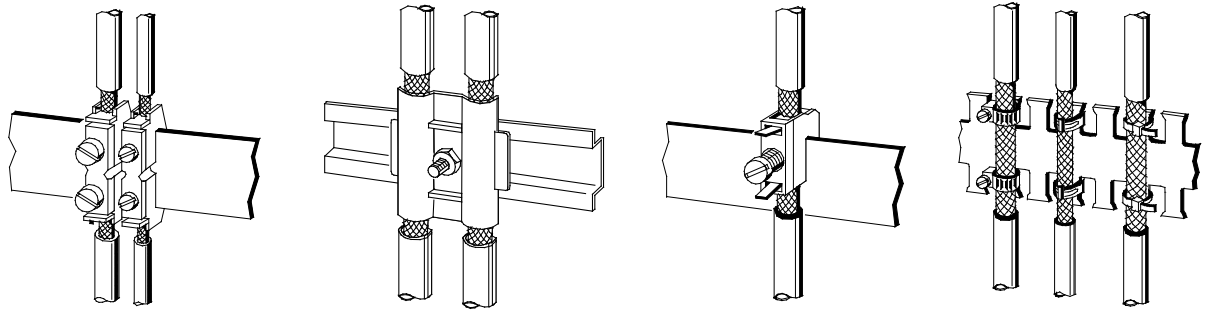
Examples of Securing Shielded Lines with Cable Clamps
